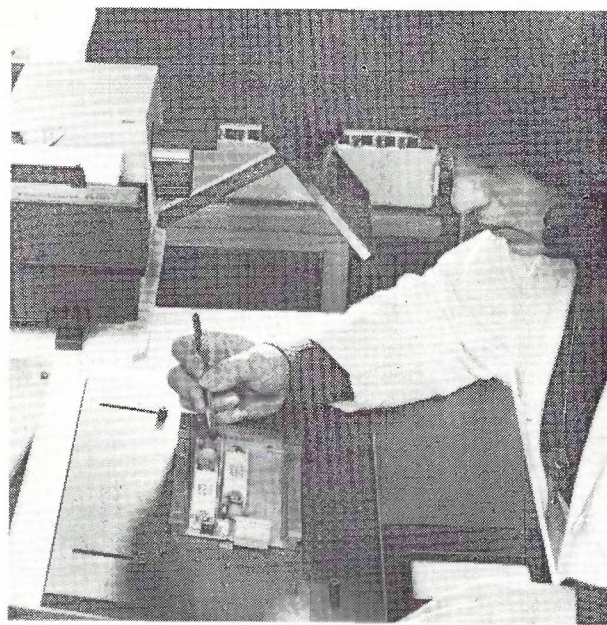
Assembly of Printed Circuit Boards using an Optical Assembly Table.
